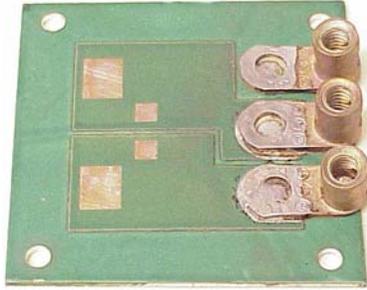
An IMS after etching, solder mask patterning process and attaching power outlets.
